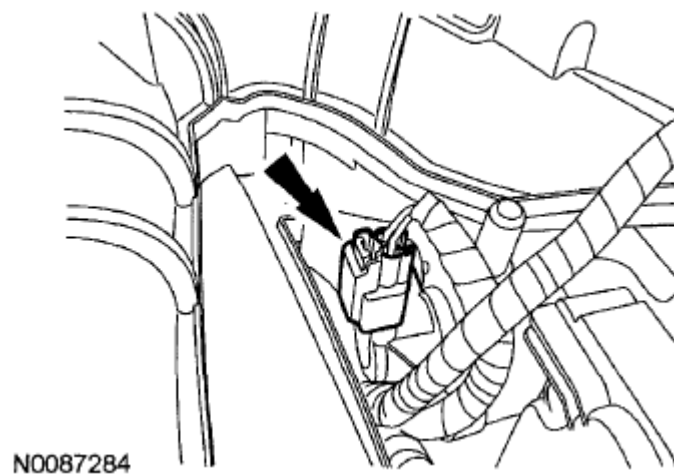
Locating Evaporative Emission (EVAP) Canister Purge Valve Electrical Connector
